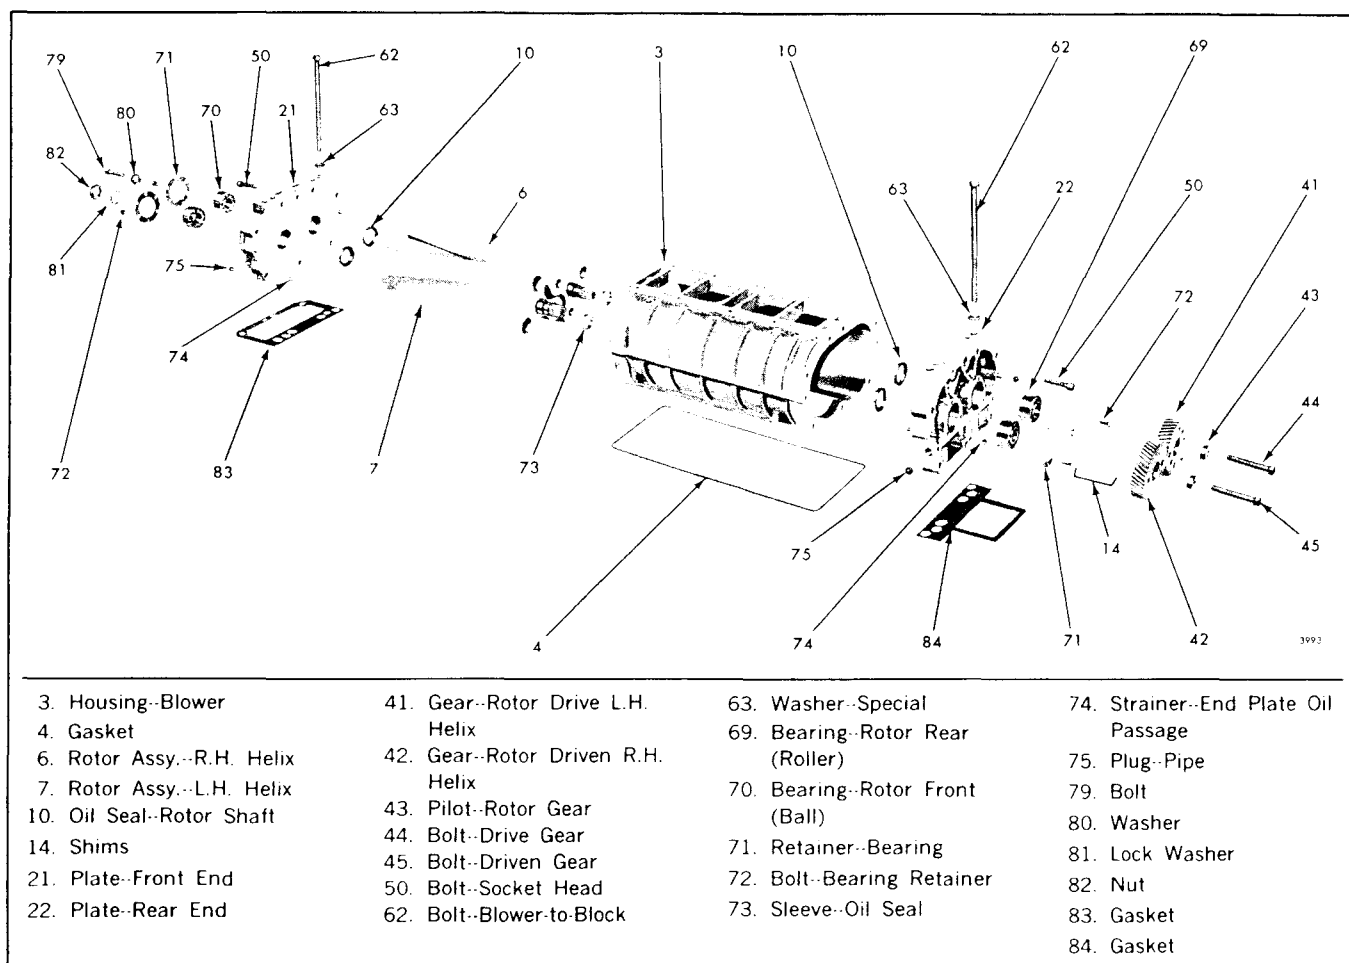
Blower Details and Relative Location of Parts (8V-53) (Former Blower)
